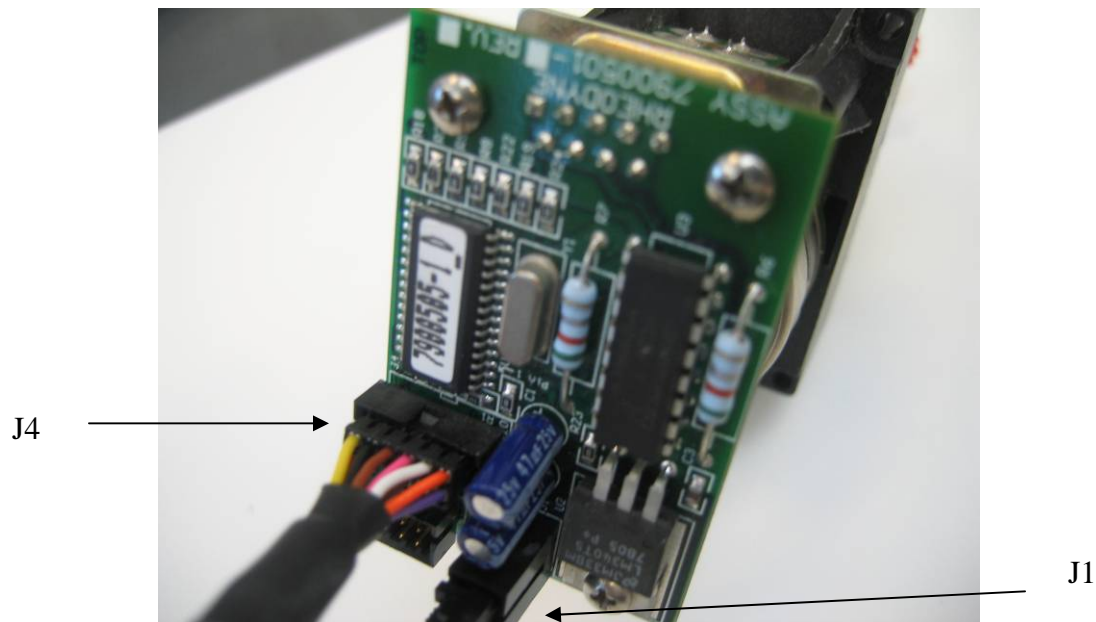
Driver Board, Control Cable and Power Supply Connections for the Mighty Valve (PCB) Driver Board shown for reference.
